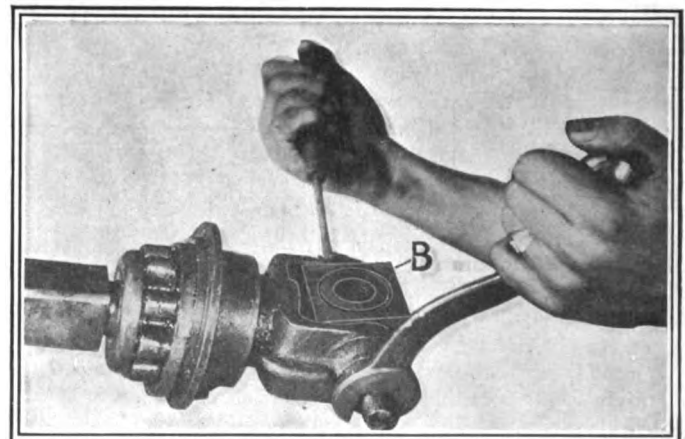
Manner of adjusting for play in universal joint with a wrench and screw-driver
